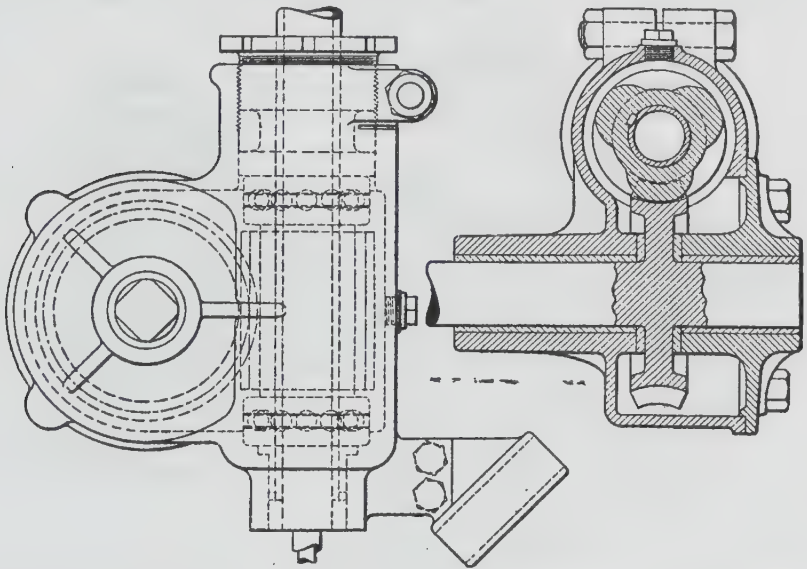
WORM AND WHEEL STEERING MECHANISM WITH ONE PART CASING.
